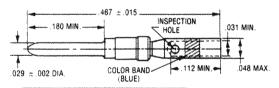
A CONTACT, SOCKET 26 THRU 30 GAGE WIRE SIZE 22 SUBMINIATURE REAR INSERTION & REMOVAL
